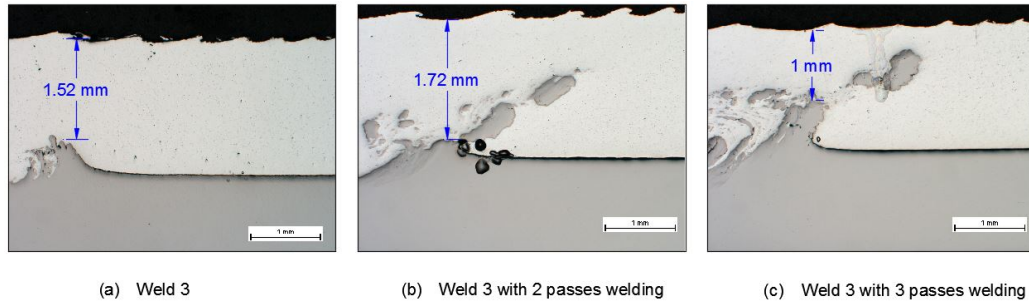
The effective thickness of aluminium alloy sheet of weld 3 and its multi-pass welds.
